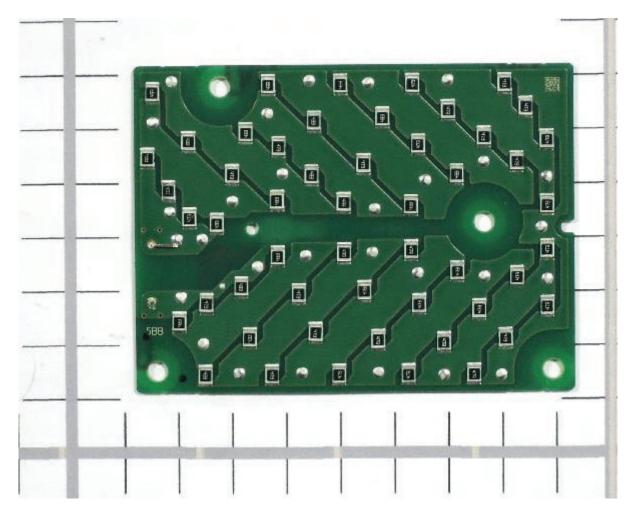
Toyota Inverter: Resistor Array Circuit Board
